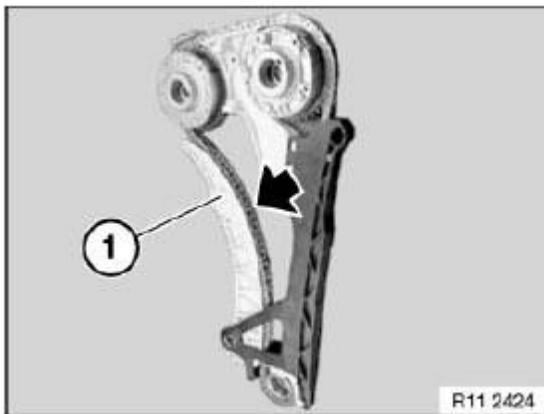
Securing Timing Chain Guided In Clamping Rail
